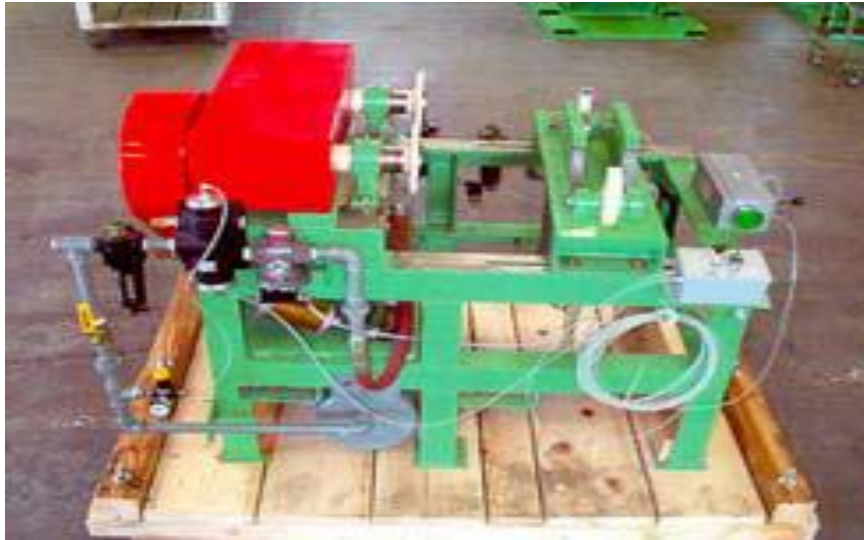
APE 1002M3 Two spindle defuzing machine.
